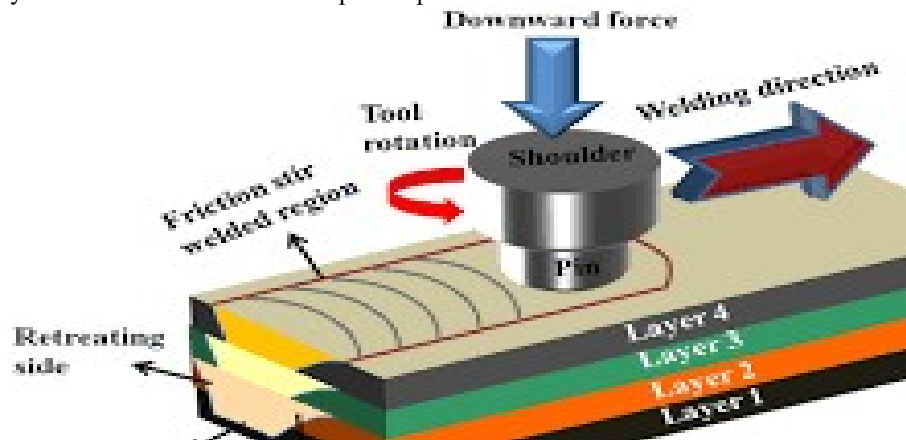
Principle of Near-net shape manufacture by FSAM [26].
